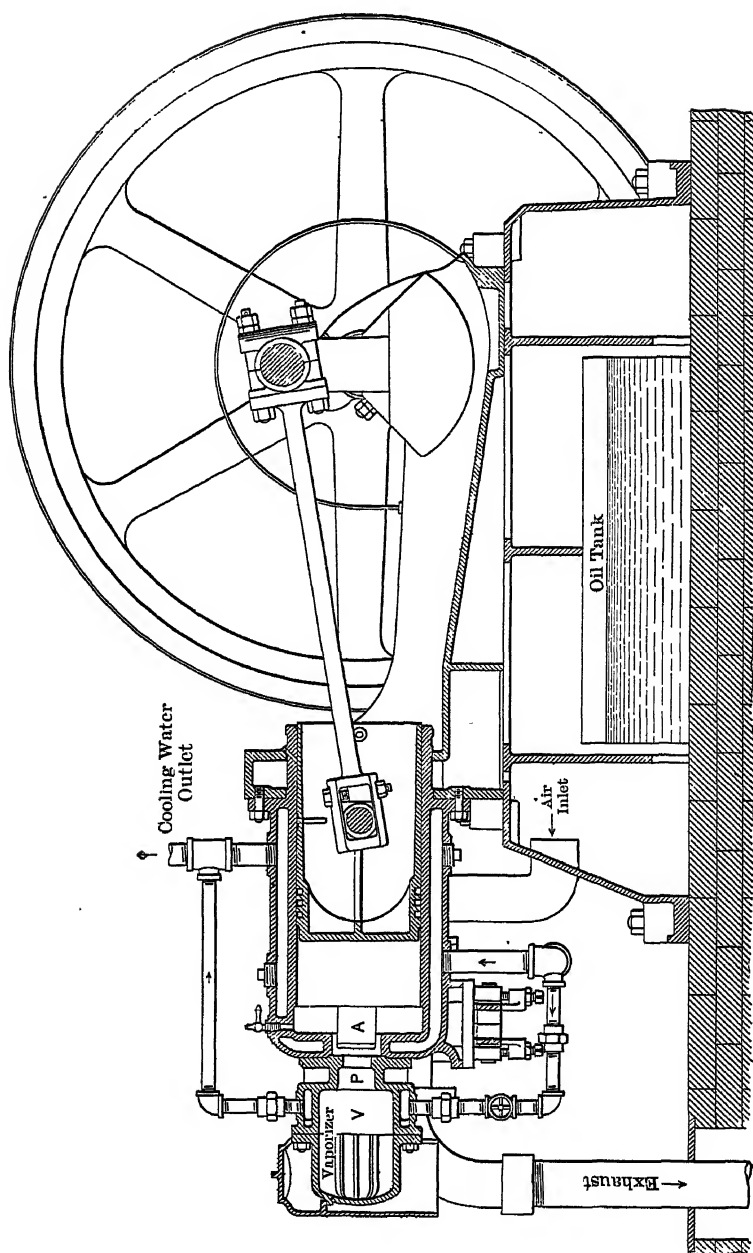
Section through Hornsby-Akroyd Oil Engine.
